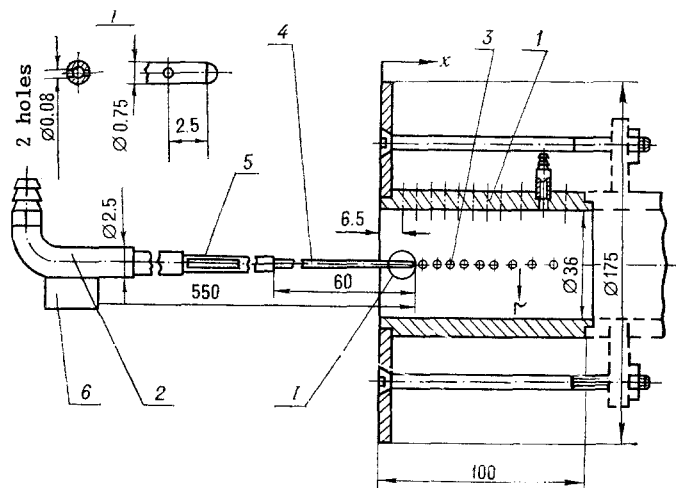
Entrance measuring section and static-pressure probe: 1) measuring section; 2) static-pressure probe; 3) taps; 4) probe tip; 5) probe holder; 6) probe bracket.
